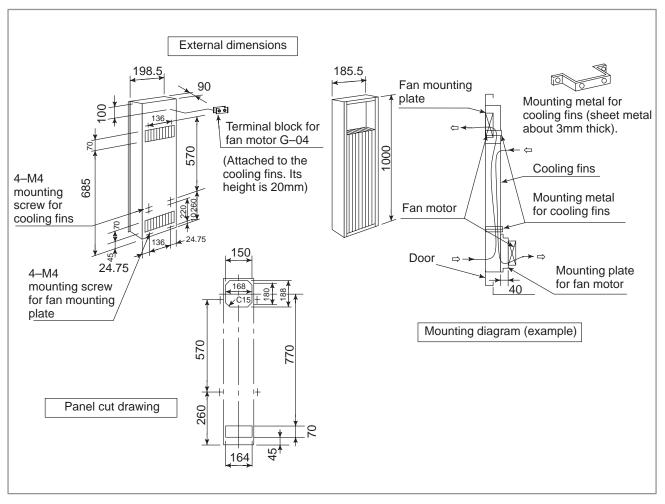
(b) External dimension and mounting method of cooling fin A (02B-0053-K303)
